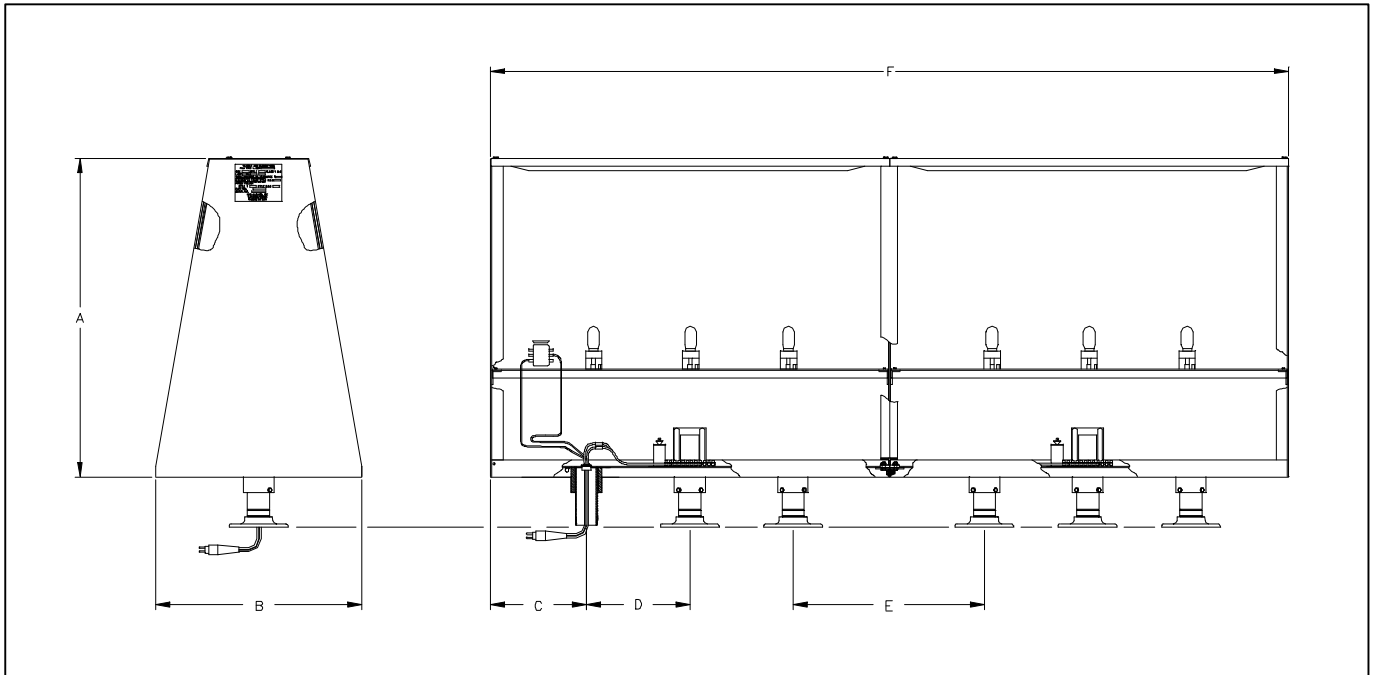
L-858 Sign Dimensions (Size 3, Two-Module)
